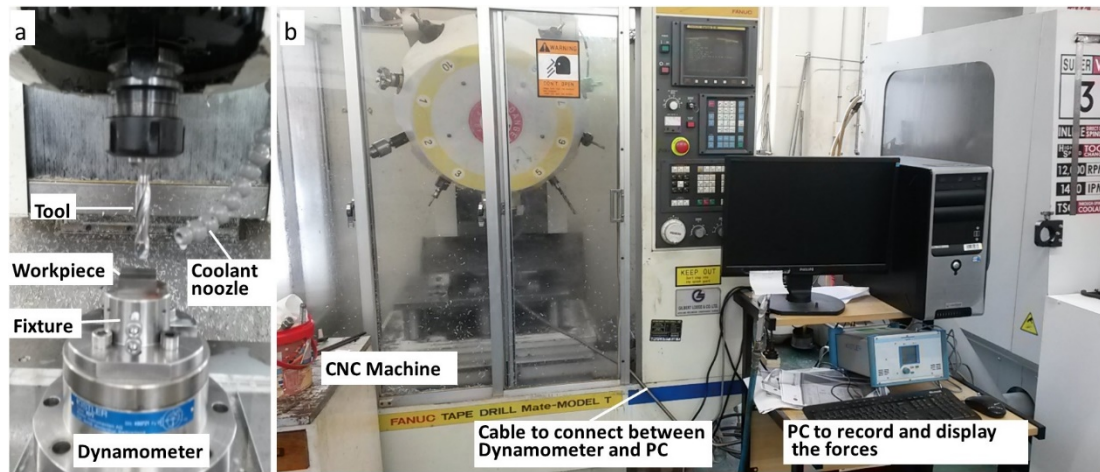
Set up for the drilling on the CNC machine: (a) arrangement of tool and workpiece, dynamometer, fixture and coolant nozzle; (b) whole arrangement to connect between CNC machine and a PC for measuring and recording the forces.
